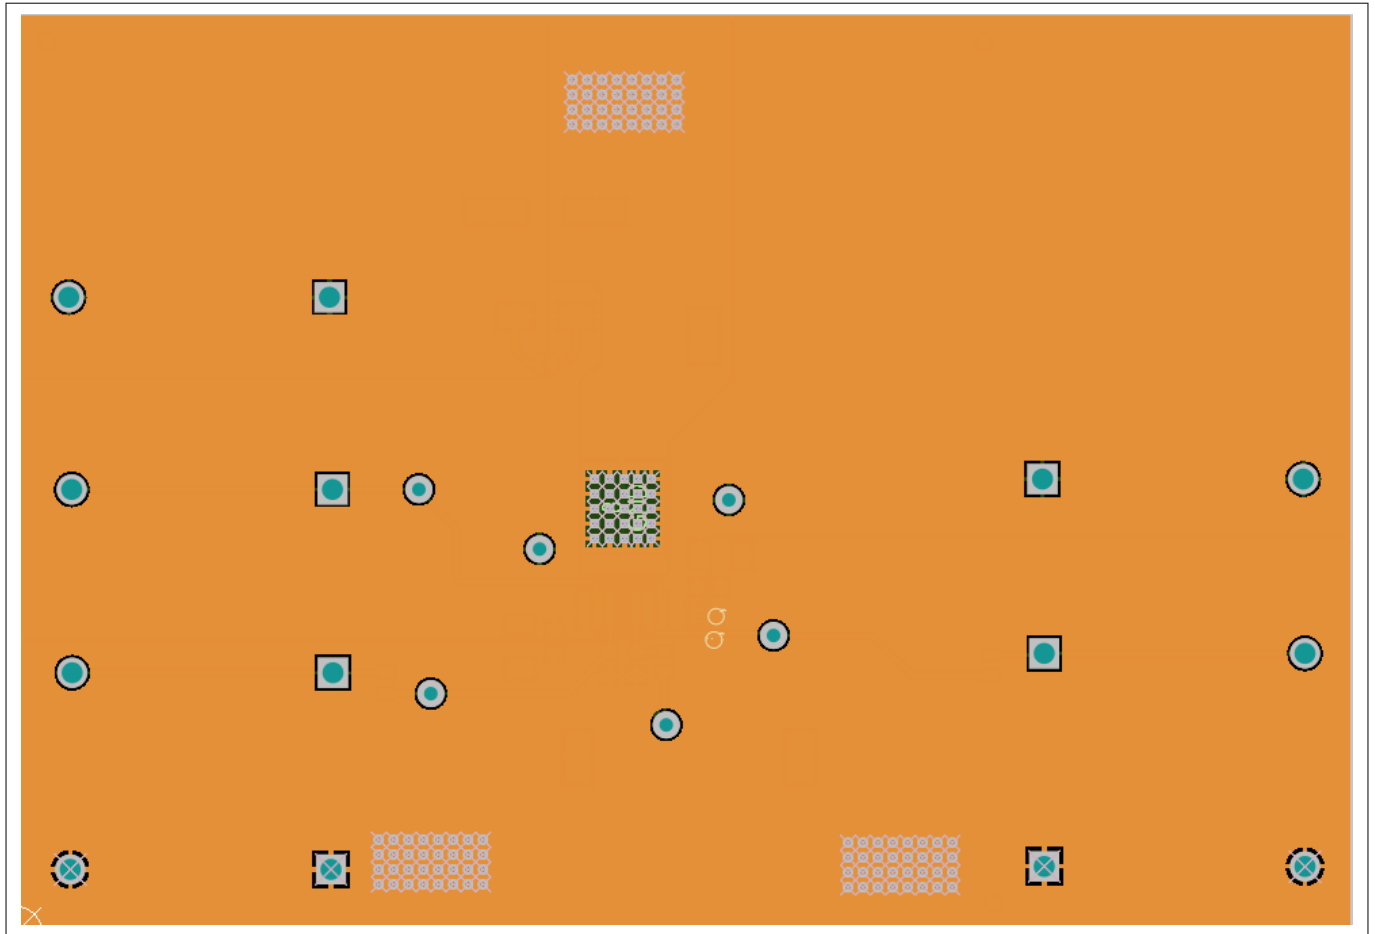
Bottom layer TLS850F3TUVxx demoboard
